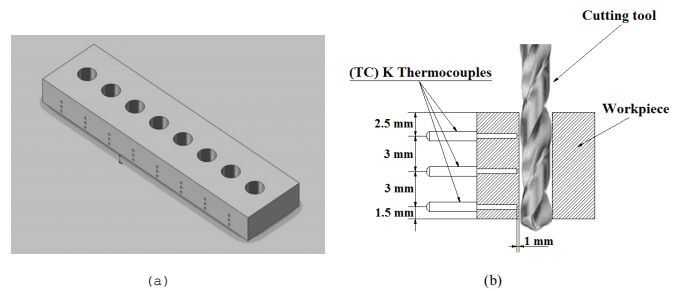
a) Holes on workpiece; b) Position of thermocouples.
